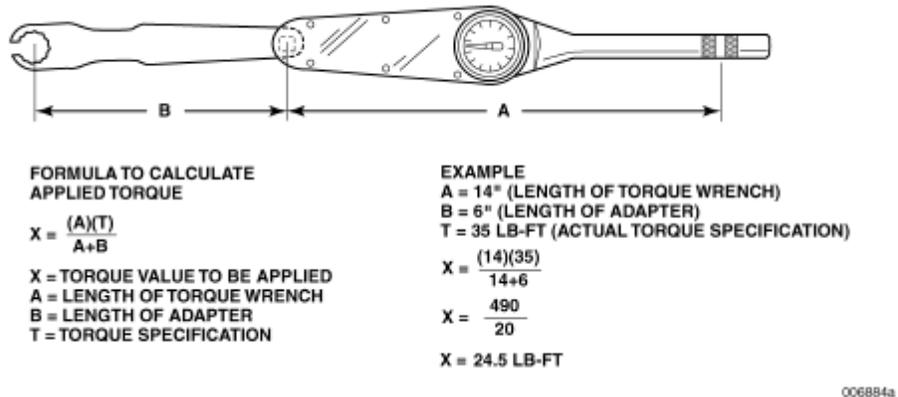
Calculating Torque When Using Line Nut Torque Adapter
